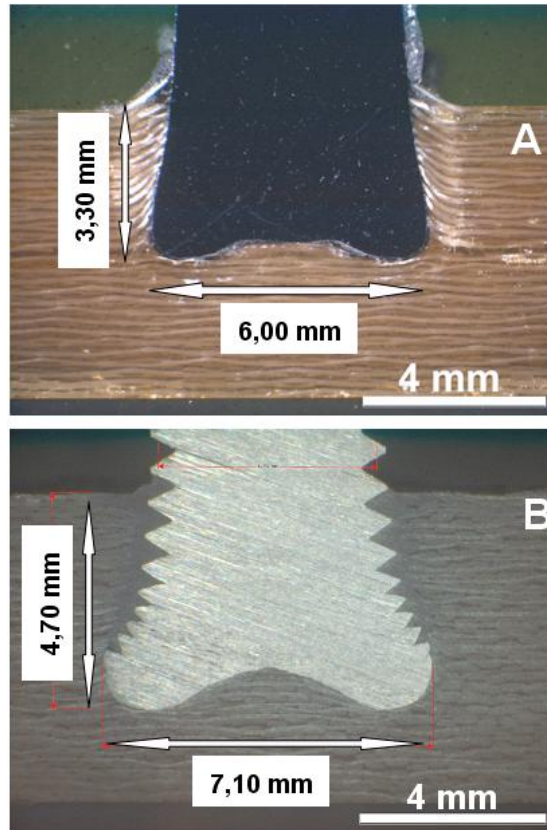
Examples of cross-sectional views for (A) a friction-riveted PEI-GF/Ti gr.2 plain rivet joint (RS = 10000 rpm, FT = 700 ms, FOT = 2500 ms, FP = 0.6 MPa, FOP = 1.0 MPa) and (B) a friction-riveted PEI-GF/Ti gr.2 M5-threaded rivet joint (RS = 10000 rpm, FT = 700 ms, FOT = 1200 ms, FP = 0.6 MPa, FOP = 0.7 MPa)
